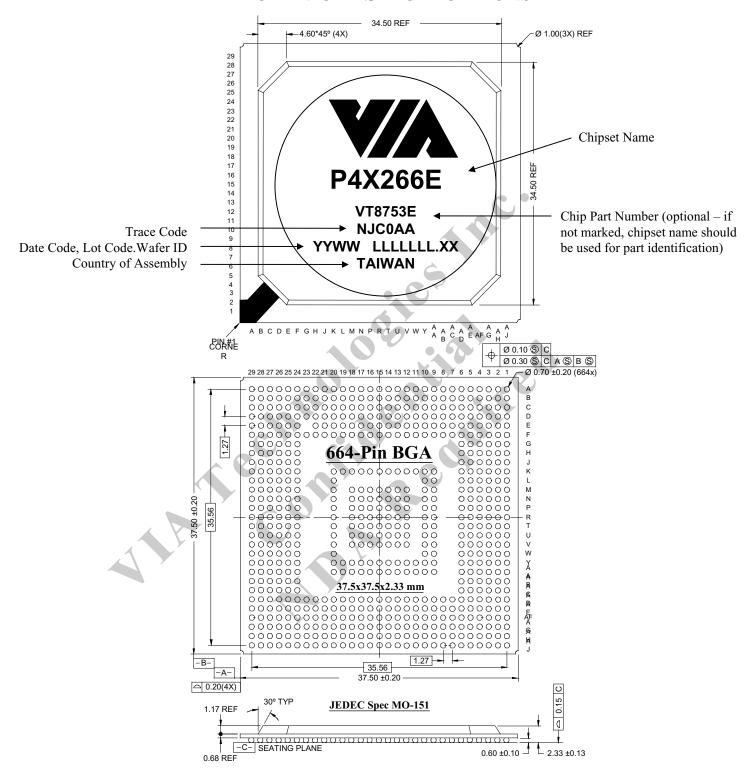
Mechanical Specifications - 664-Pin Ball Grid Array Package
